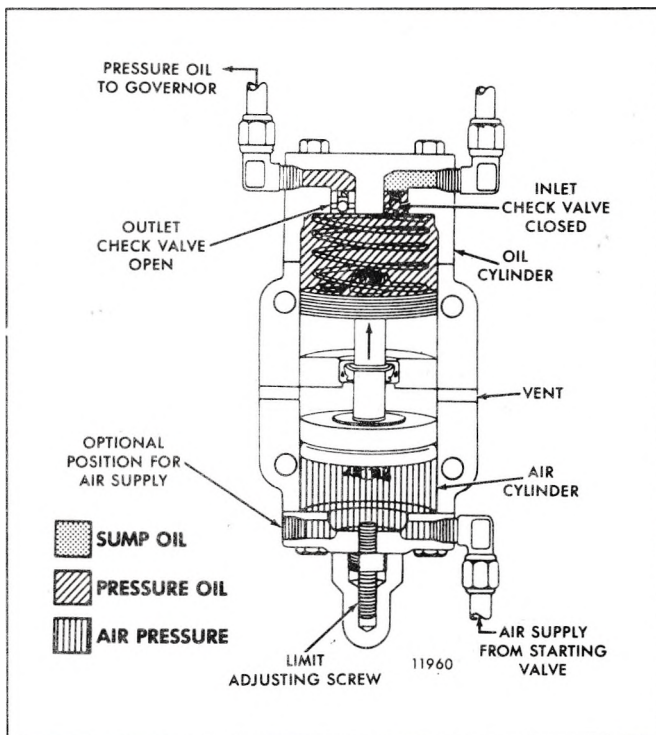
Oil Pressure Outlet Check Valve in Open Position
